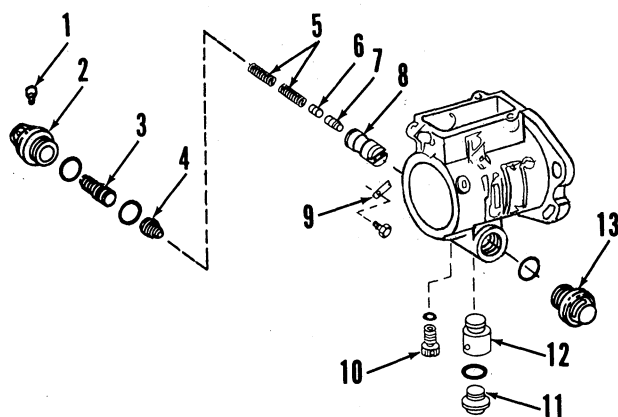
On Model 4050, injection pump advance timing is adjusted by turning trimmer screw (3) located on side of pump housing. Refer to text.
